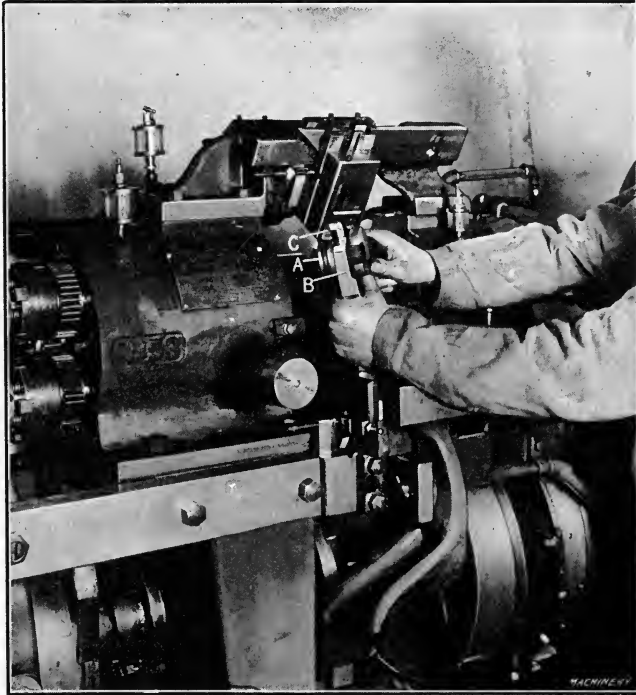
Setting the Cutting Edge of a Circular Forming Tool to the Proper Height with a Tool-setting Gage
